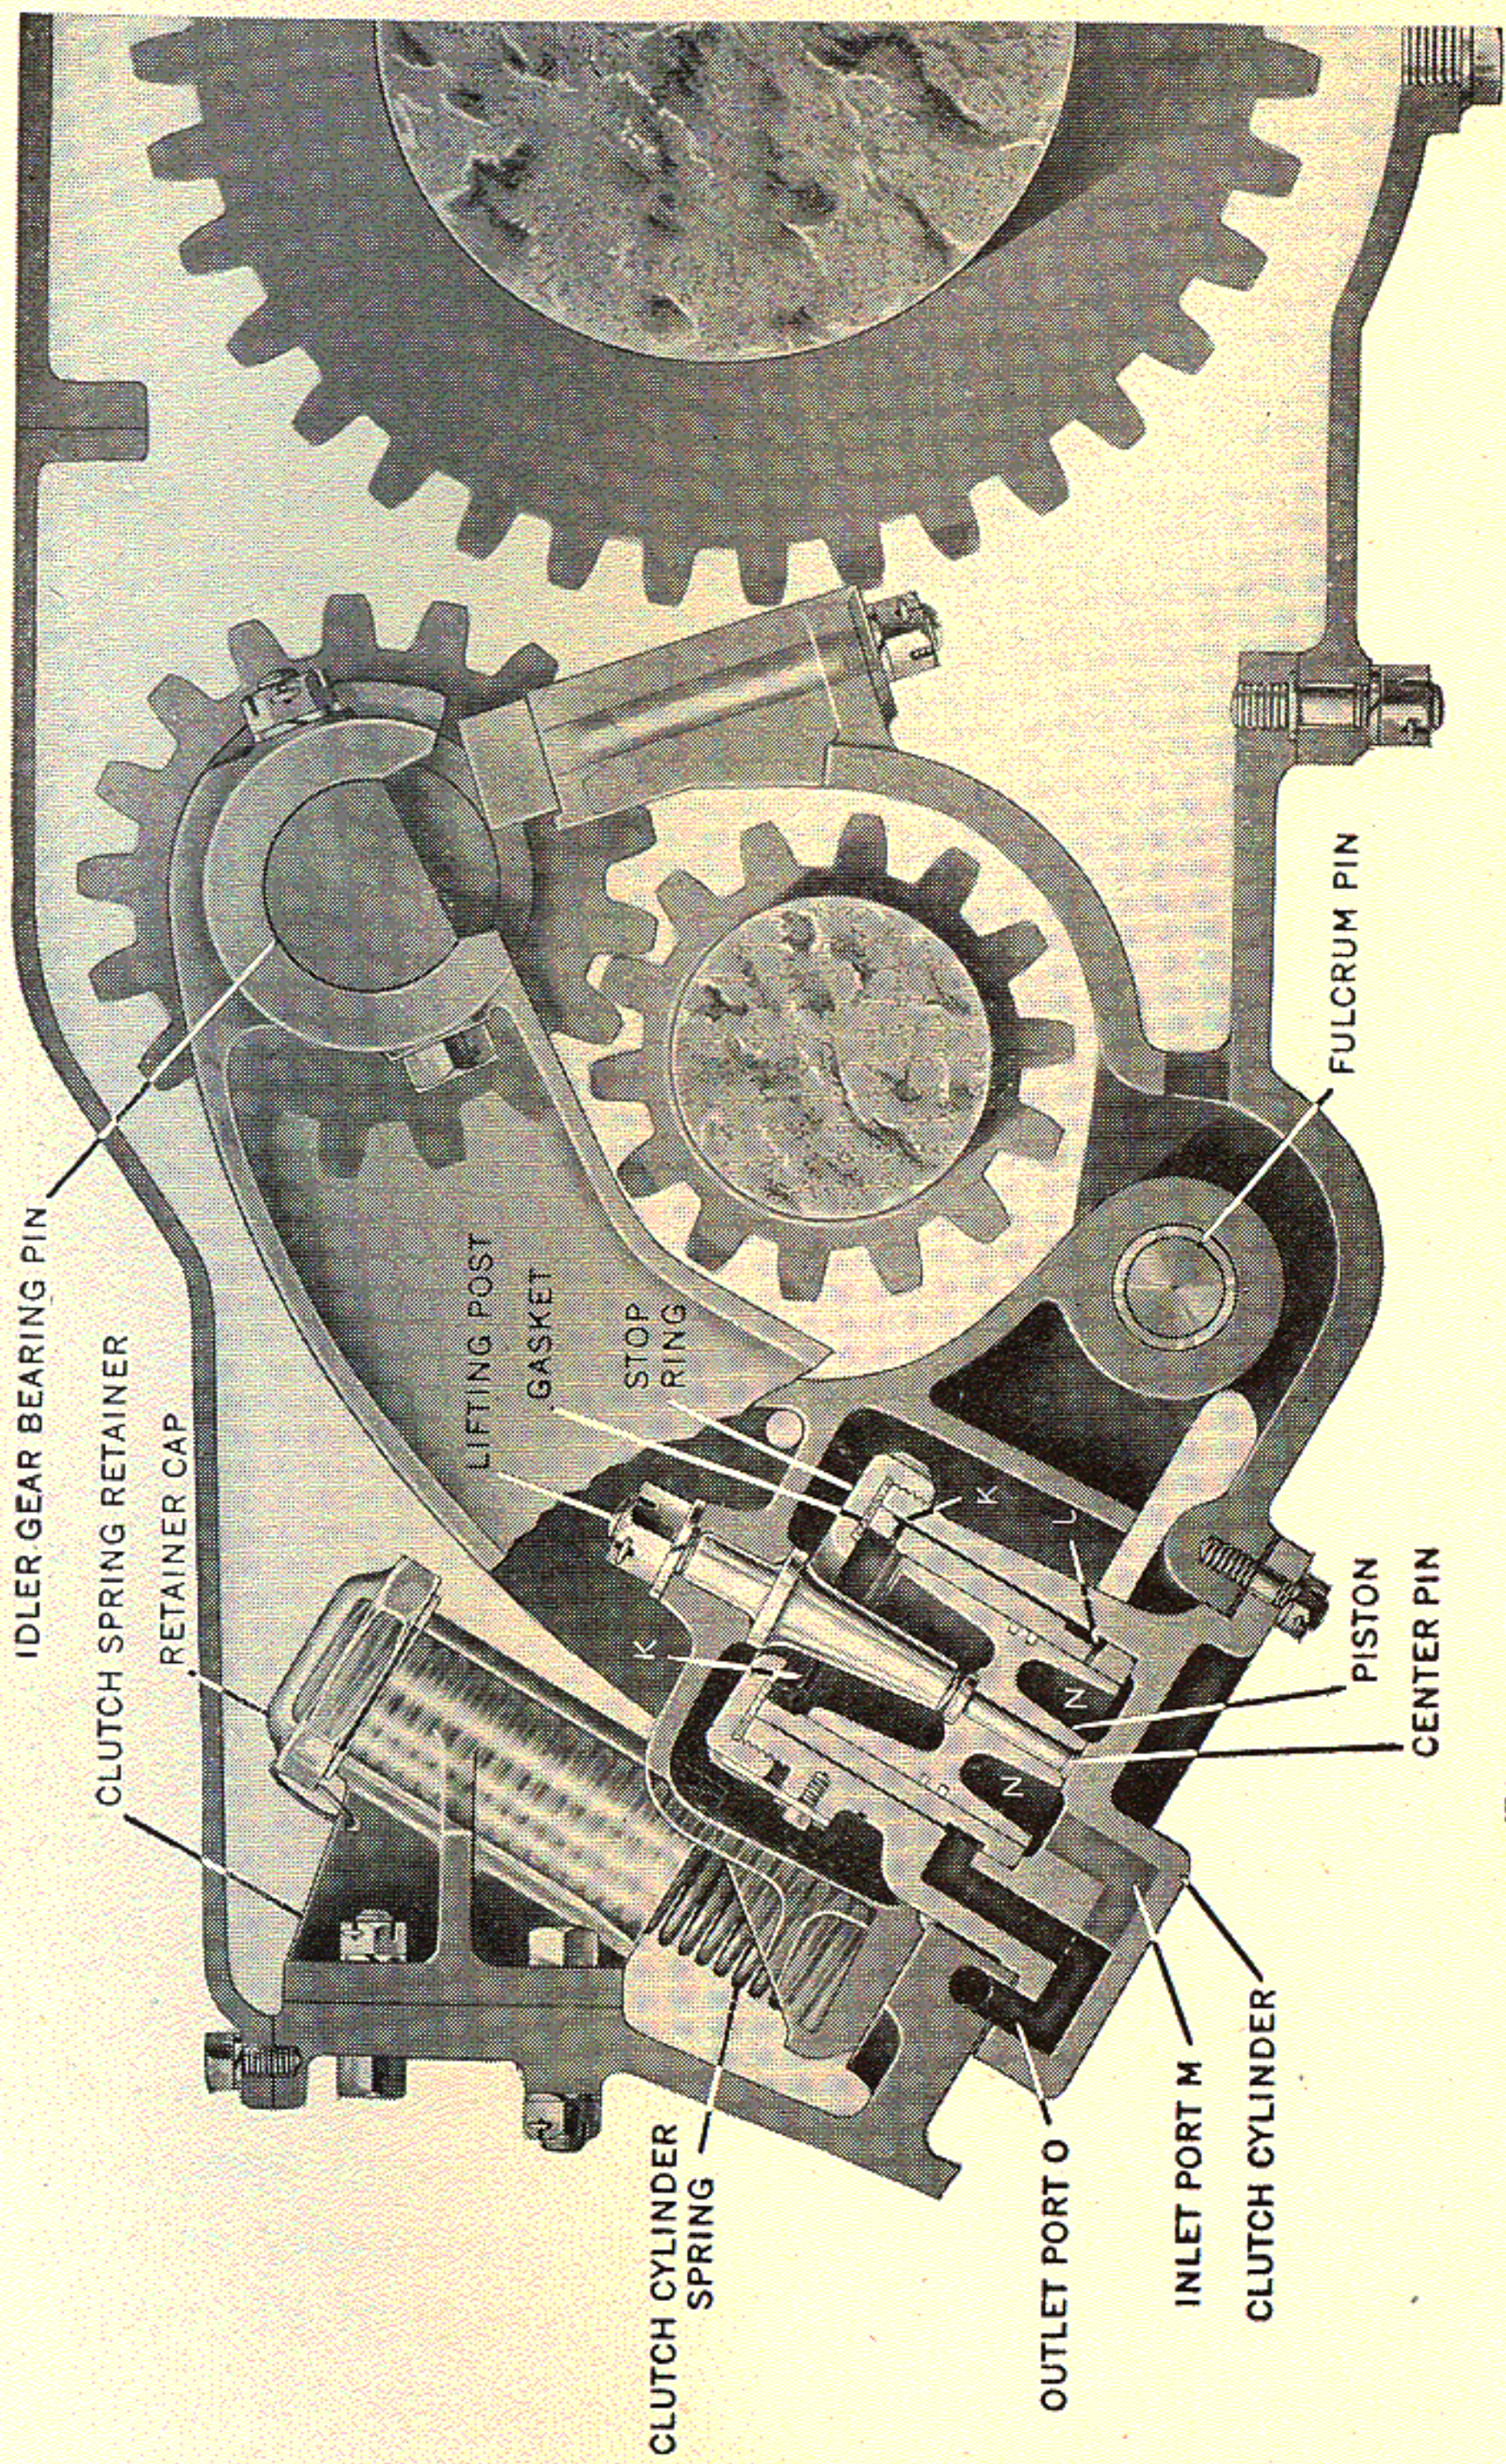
Type C-2 Booster Clutch Cylinder; Release
